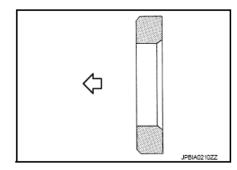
Locating Pilot Converter Chamfered Side Courtesy of NISSAN NORTH AMERICA, INC.
